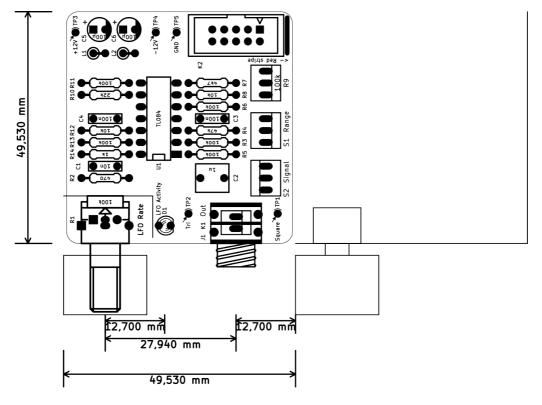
Layout and dimensions (suggested layout for a dual gang configuration)
